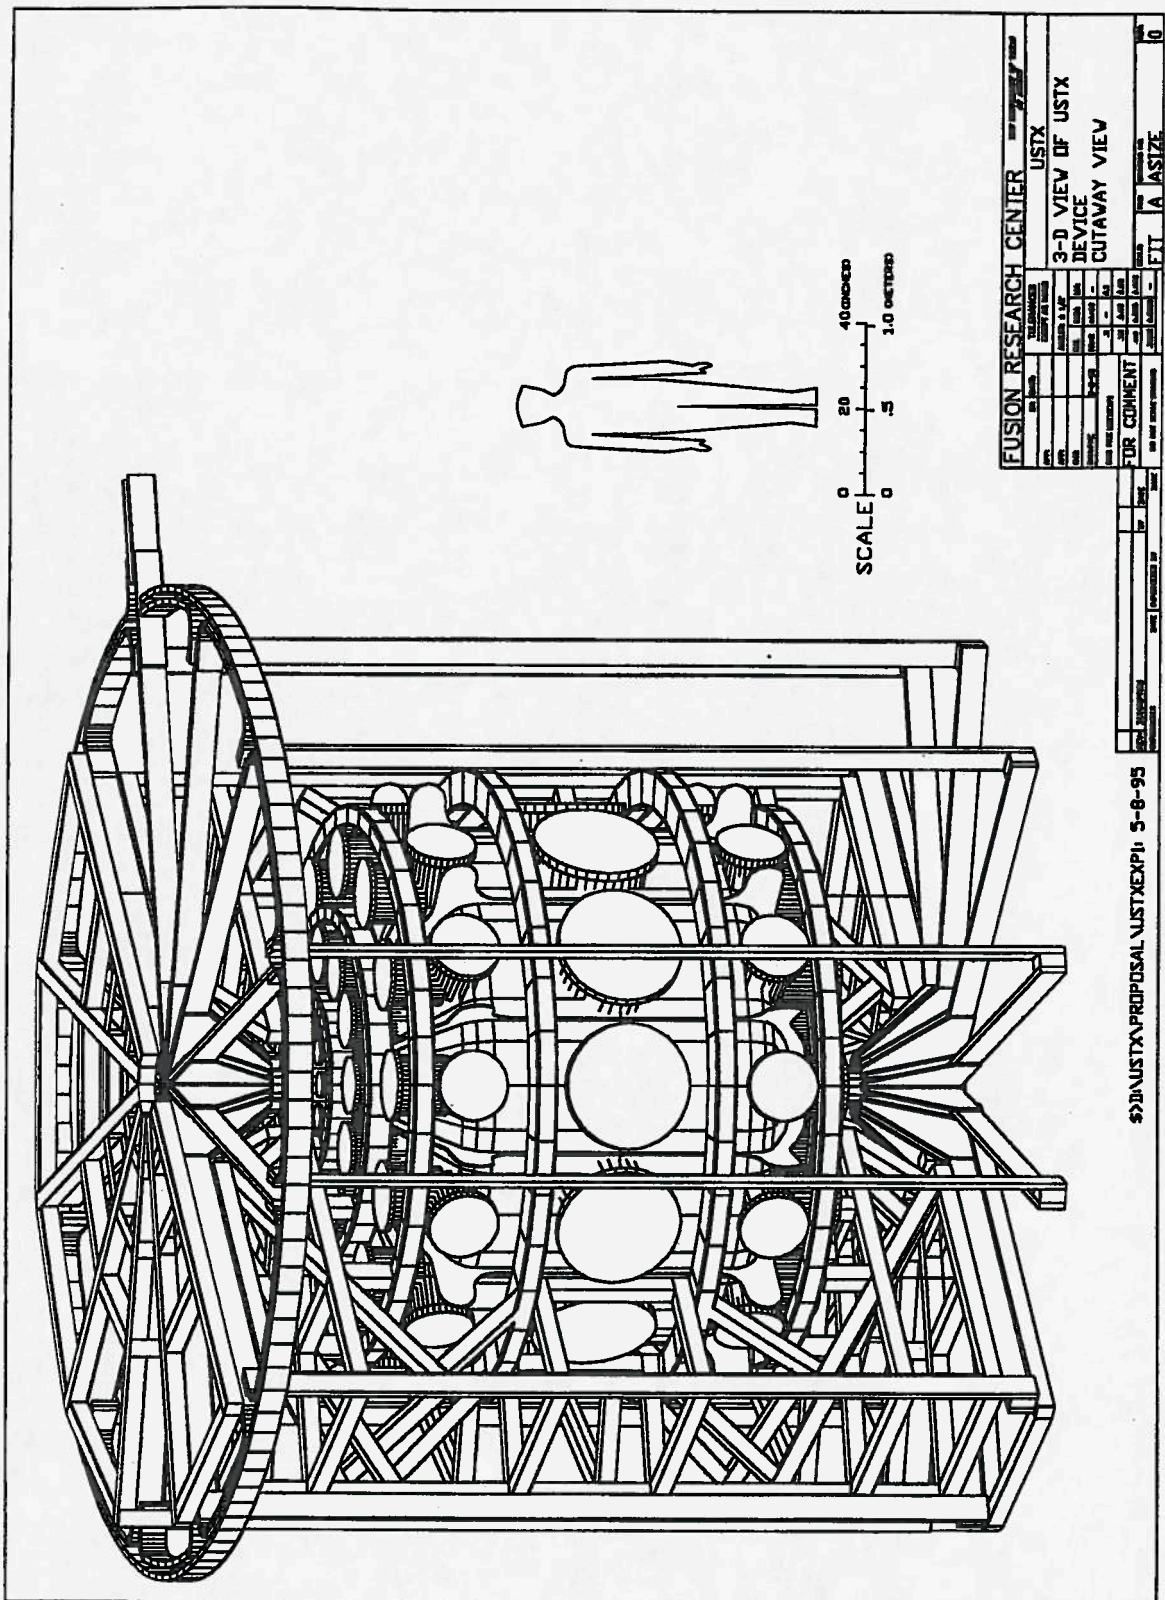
3-D view of the complete USTX tokamak assembly.
